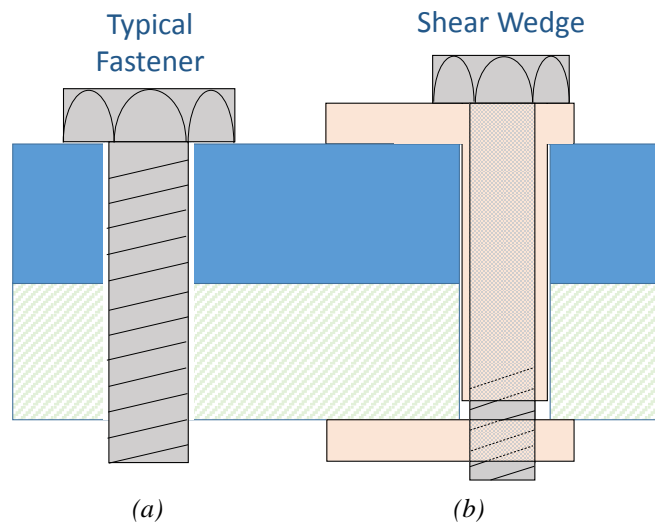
Fastener configurations for TSS-1 (a) nominal fastener in joint assembly, (b) modified joint assembly
